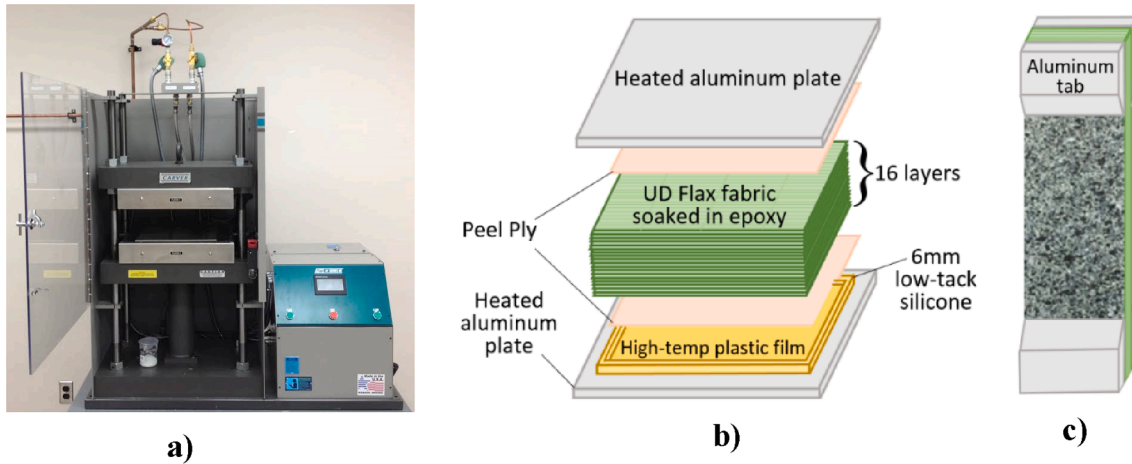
Composite manufacturing setup: a) Compression molding machine, b) lay-up, c) test specimen with Aluminum tabs and speckled pattern sprayed of the outer surface for DIC measurements. (For interpretation of the references to colour in this figure legend, the reader is referred to the web version of this article.)
